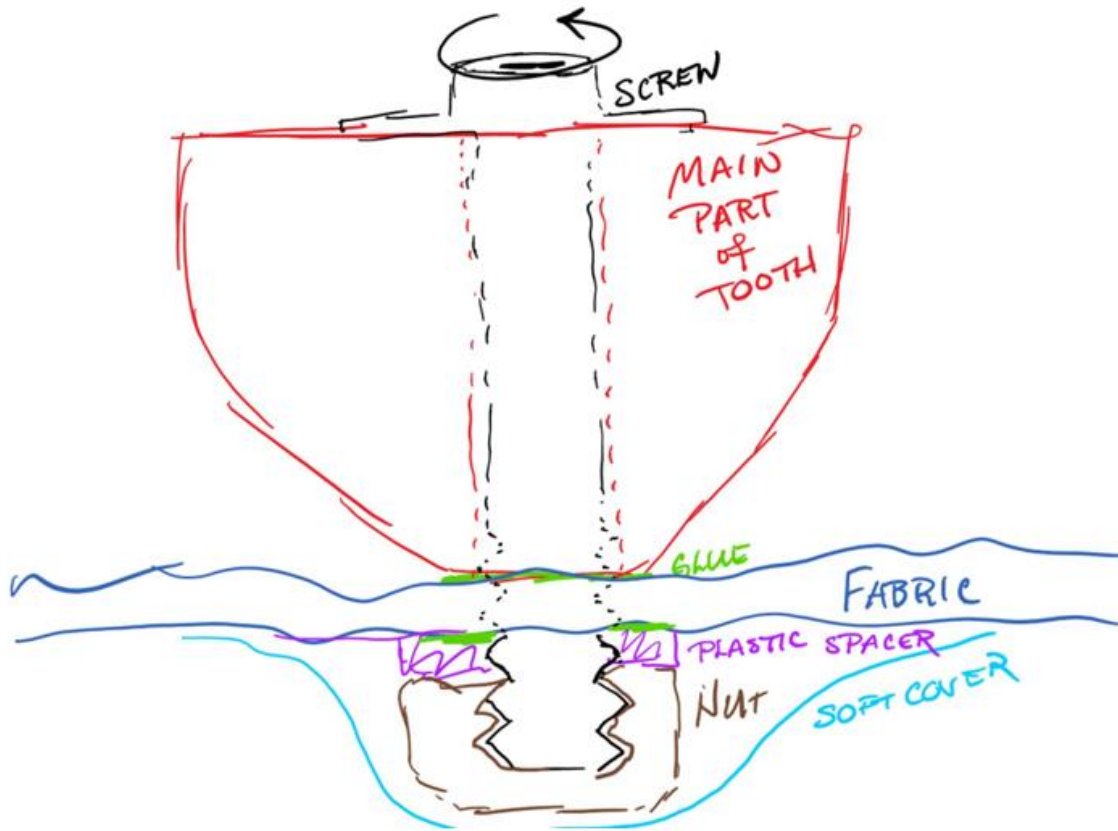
Sketch of proposed threaded fastener system for holding the teeth to the fabric. The threaded fastener should later be replaced with rivets, which are cheaper both to purchase and to assemble.
